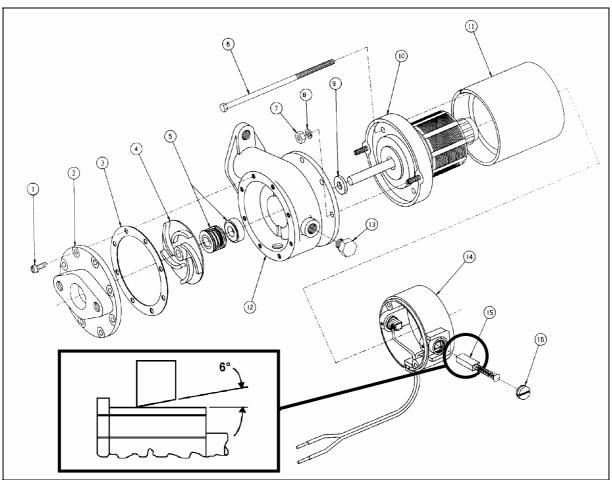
WATER RECIRCULATING PUMP (COACH - CENTRAL A/C OR DRIVER'S A/C)
